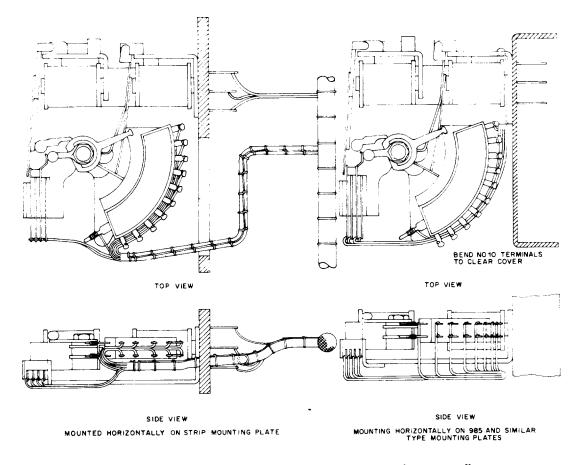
Selectors—204 and Similar Types Mounted Horizontally
